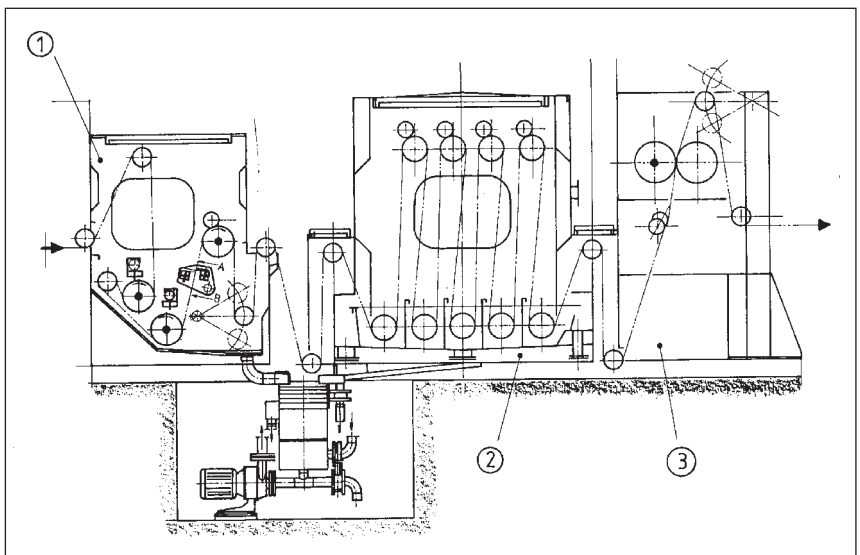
Babcock Super-Sat laboratory machine for the Lower Rhine College of Technology.
